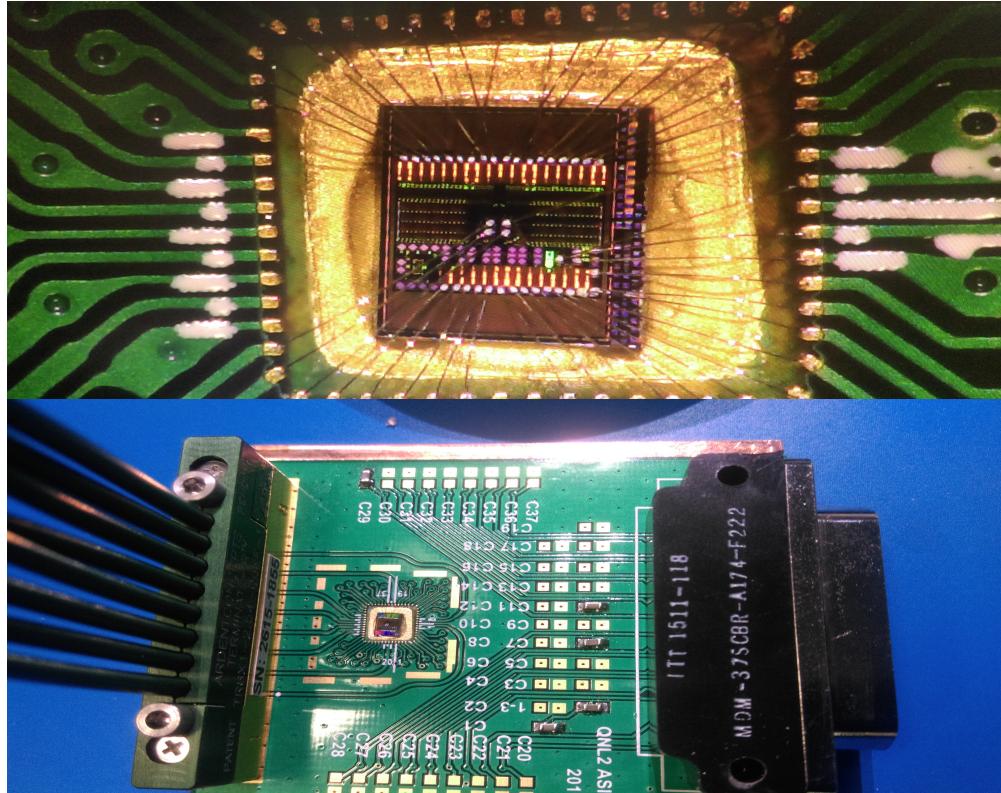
Bonded chip (QNL2 CMOS) and test PCB.
